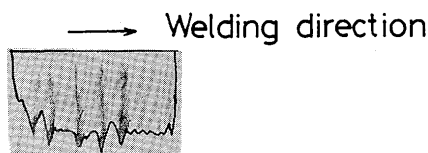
Schematic representation of weld penetration shape photographed by the pin hole camera.
